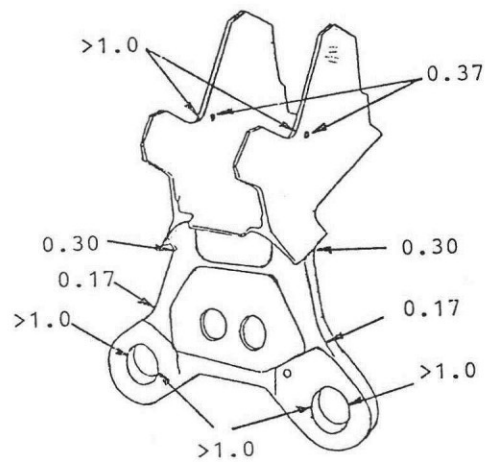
Suggested inspection intervals in design life times (DLT), to ensure damage tolerance of the forward fin attachment
